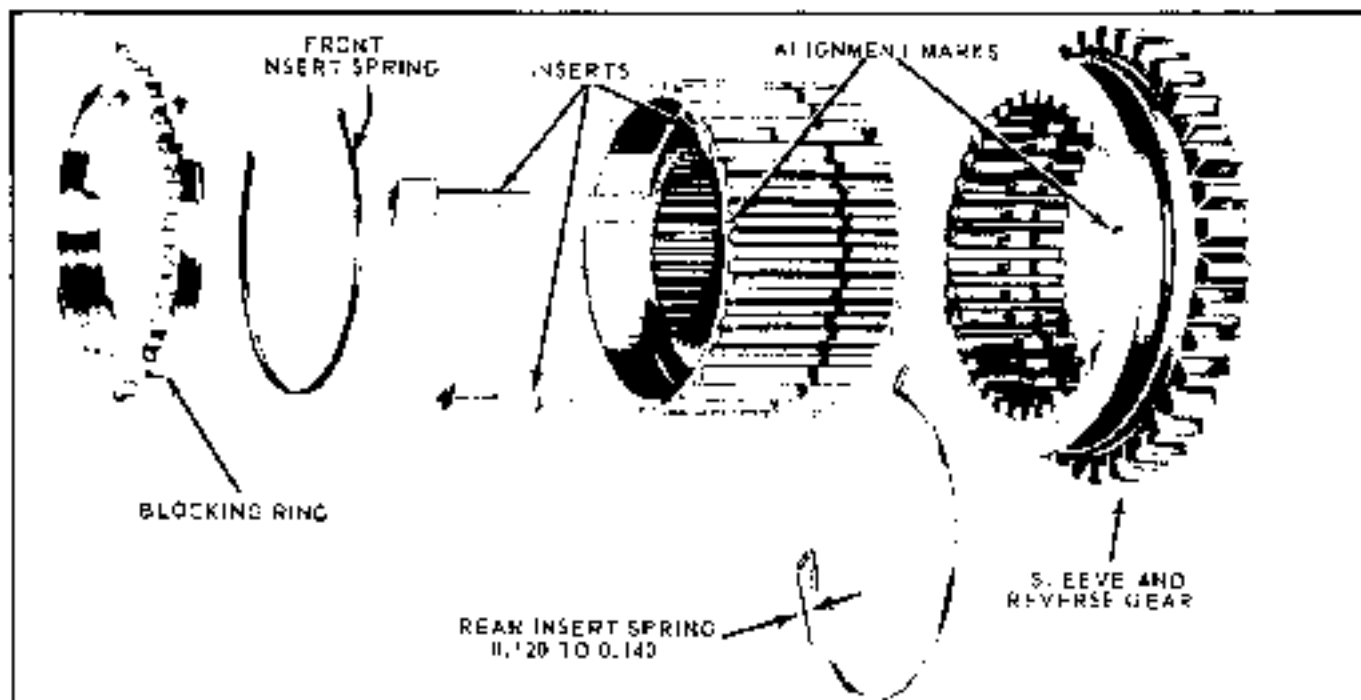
A-17 Exploded View of First and Reverse Synchronizer
